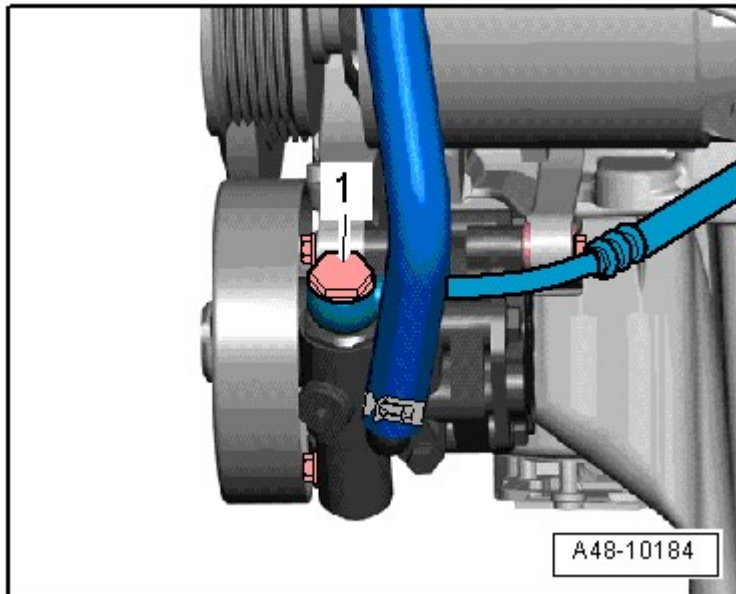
Identifying Power Steering Pressure Line Banjo Bolt -1-
